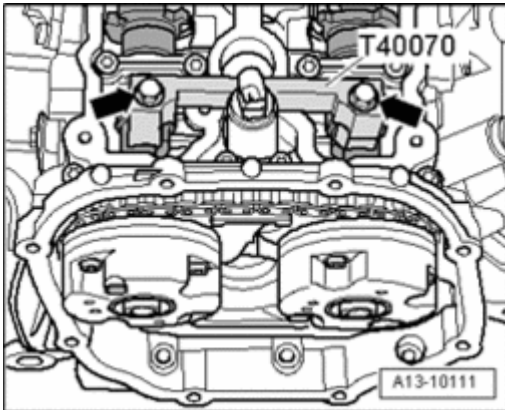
Mounting Camshaft Locating Tool T40070 To Both Cylinder Heads And Tightening Bolts
